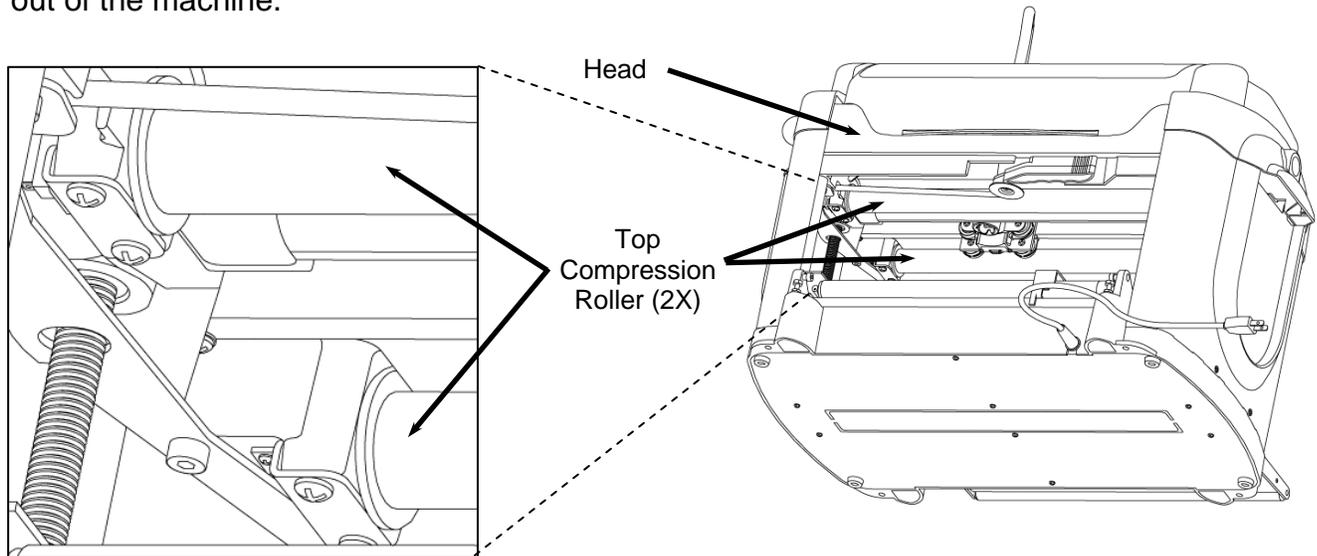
VIEW SHOWING TOP COMPRESSION ROLLERS
